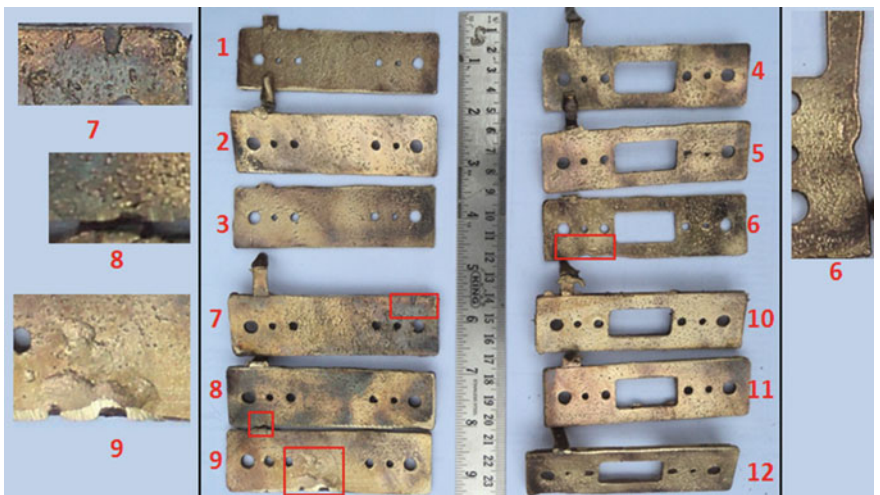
Surface with enlarged view of casting defects of cast plates with sample no
